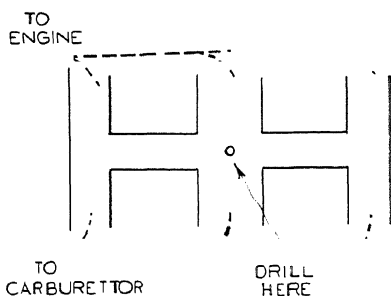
USUAL POSITION OF CONNECTION OF VACUUM GAUGE WHERE THREE CARBURETTORS ARE FITTED
